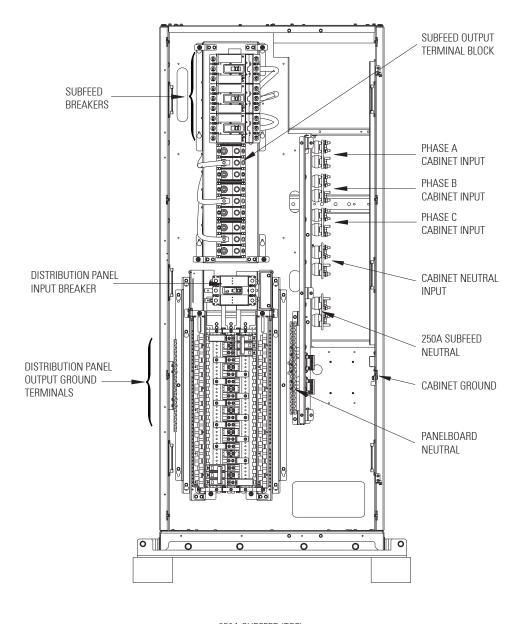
IAC-PD with Top Subfeed Breaker and Bottom Panelboard – Terminal Locations
